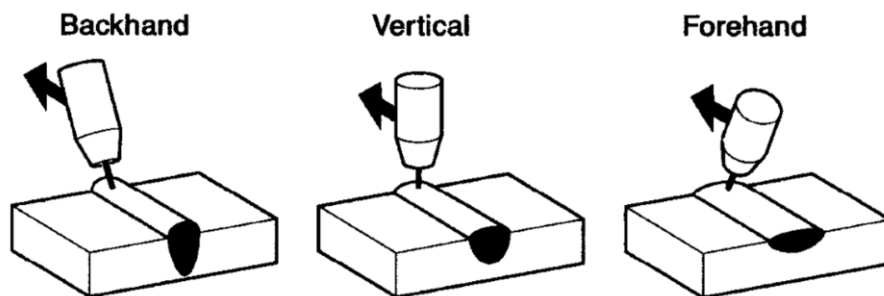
The demonstration of the effect of filler angle on weld appearance and penetration [26].
